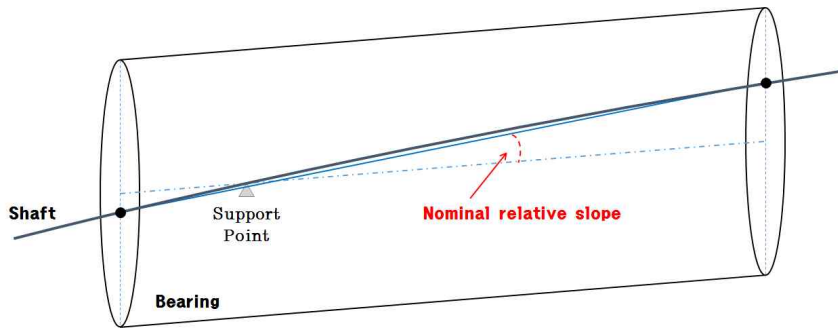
Definition of relative slope on Aft. stern tube bearing
